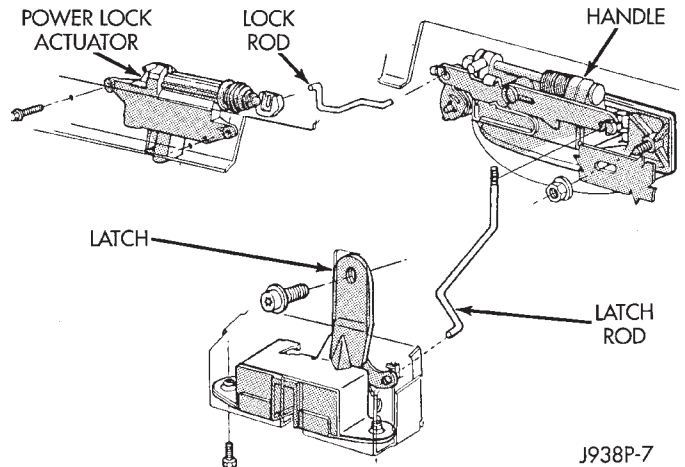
Liftgate Lock Actuator Motor Remove/Install
